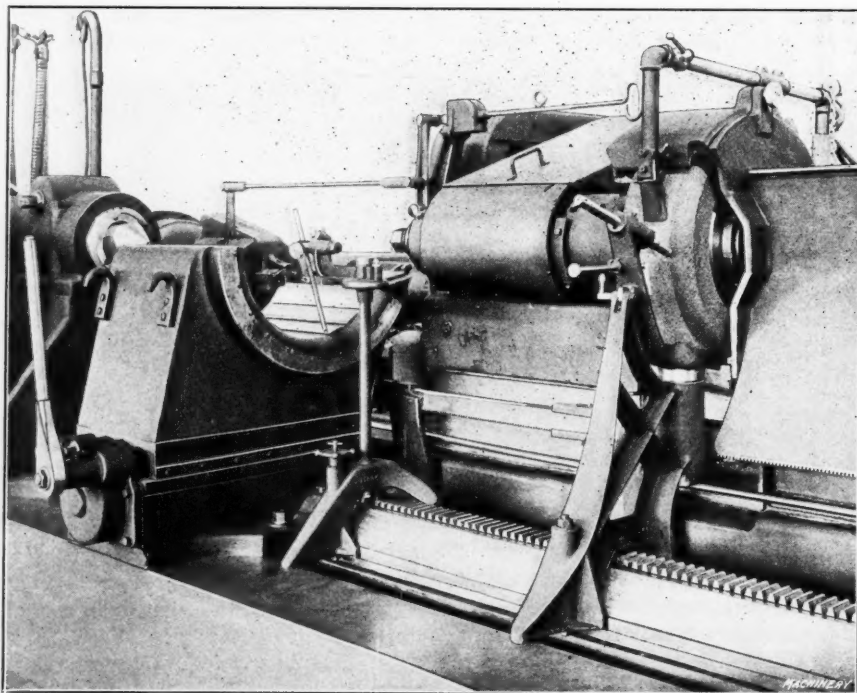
Journal Rests of Norton Roll Grinding Machine showing Trammel for setting Shoes
